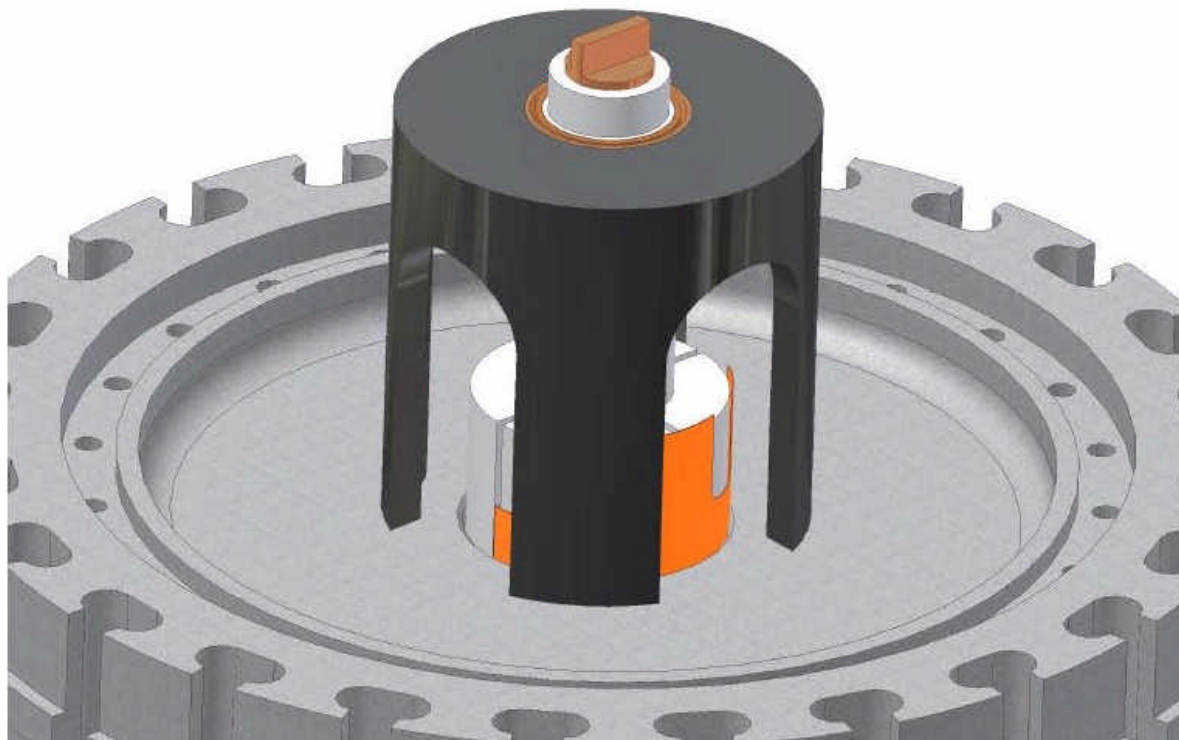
Designed Fixture Placing and Holding MCP at Engine Bore ID Location
